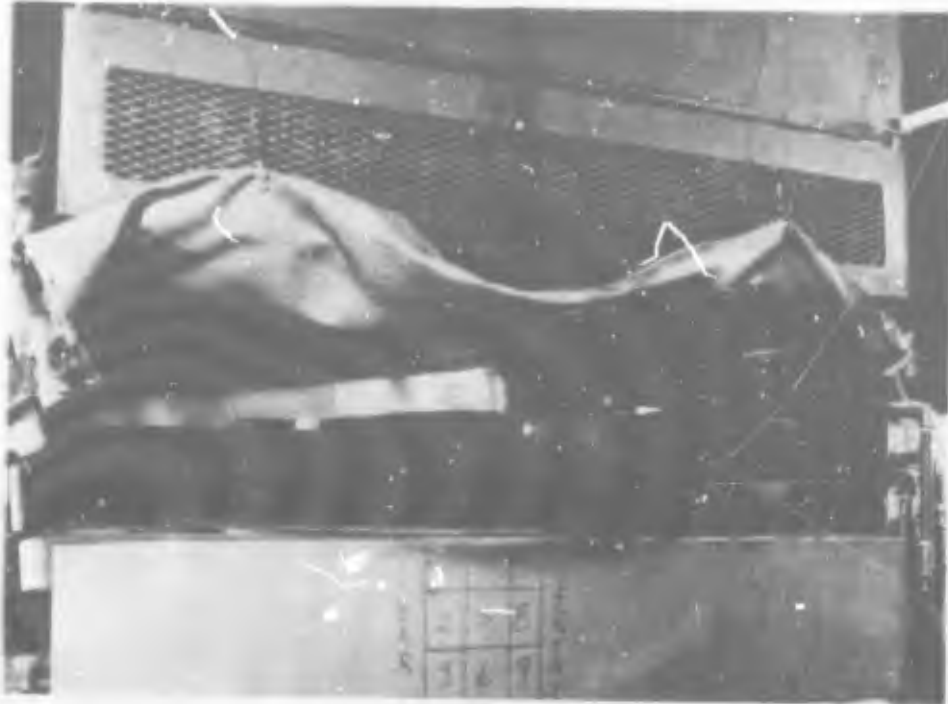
The Horizontal Draw Die Mounted in the Press
